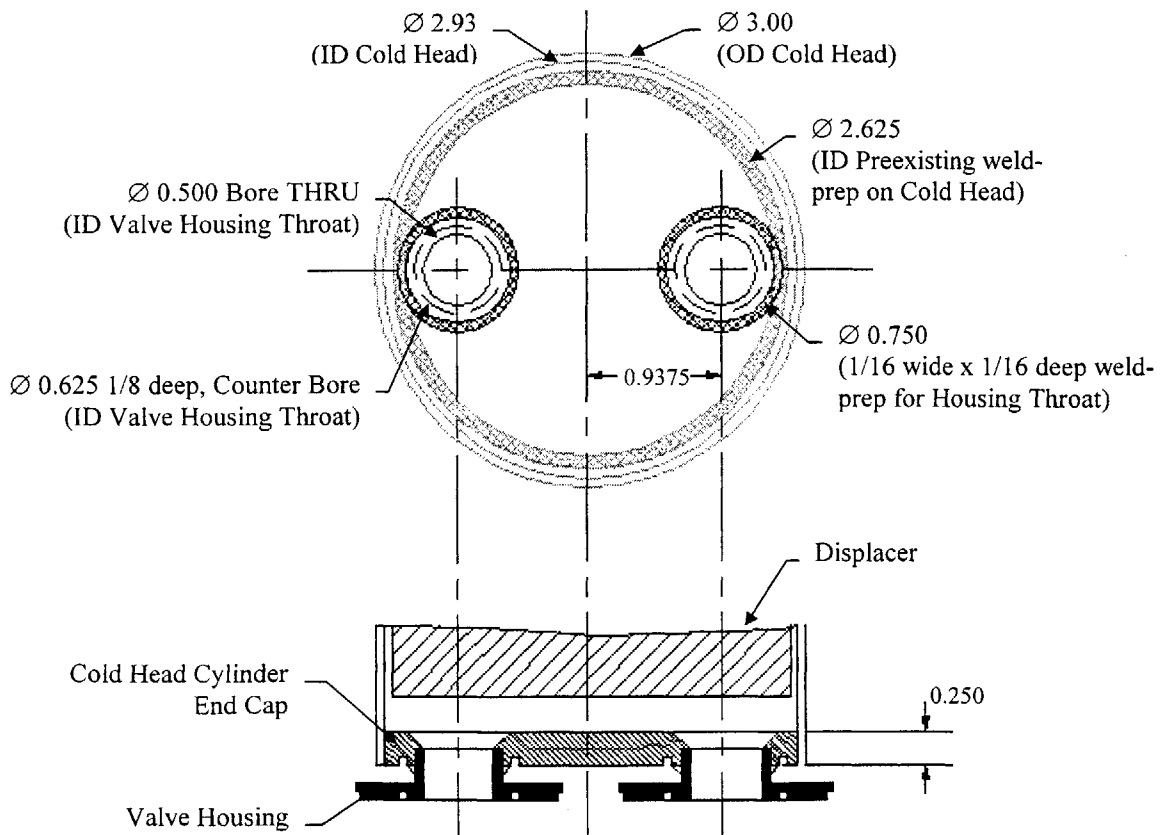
Cross-sectional view of chamfering of Cold Head Cylinder Cap.
